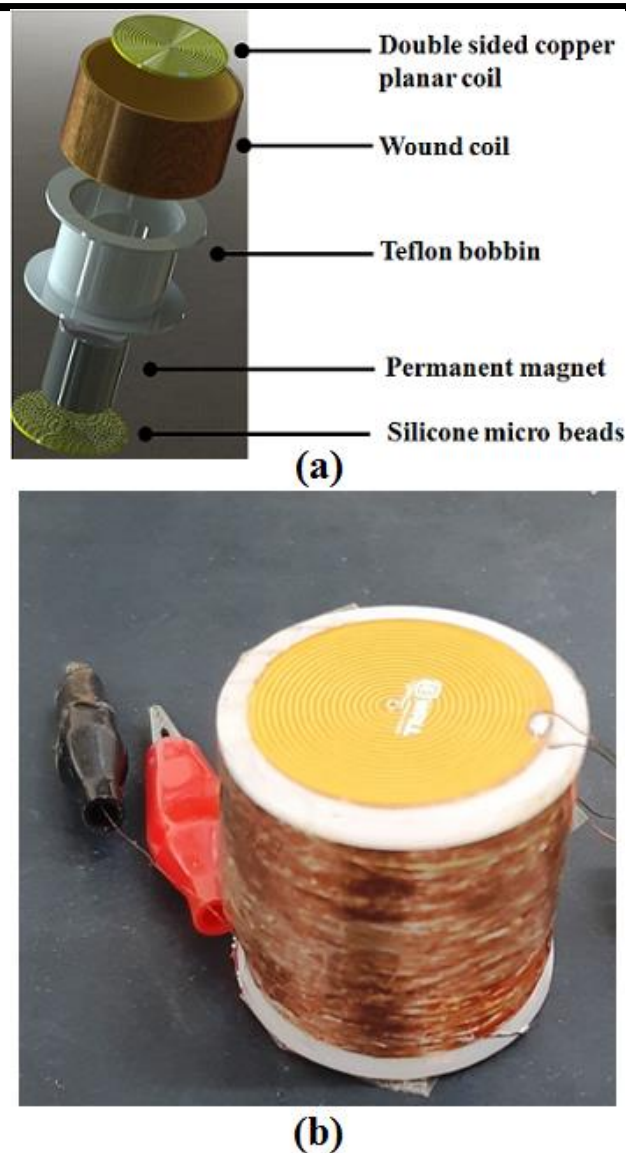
(a) Exploded view of VEMEH (b) Developed VEMEH
